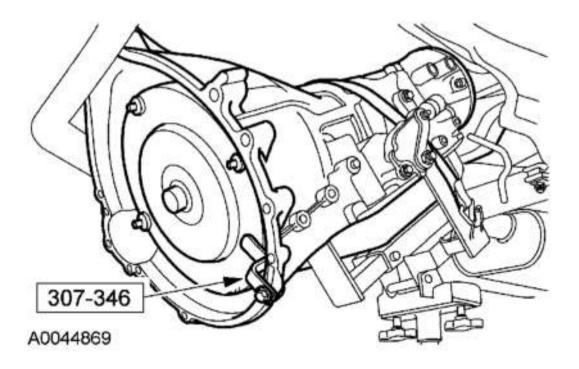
Installing Special Tool Courtesy of FORD MOTOR CO.
